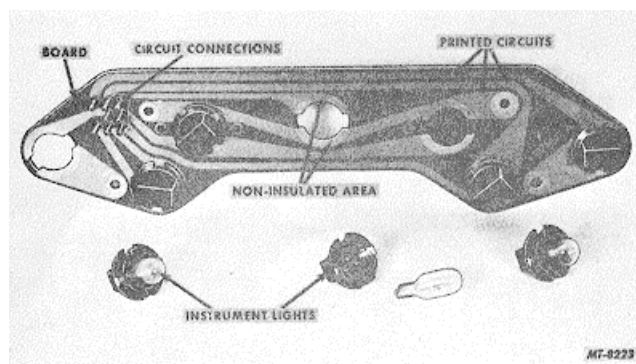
Electrical Instrument Gauge Printed Circuit Board.
